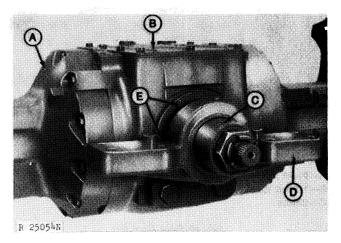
Adjusting Lock Linkage (Cab Removed For Illustration)
